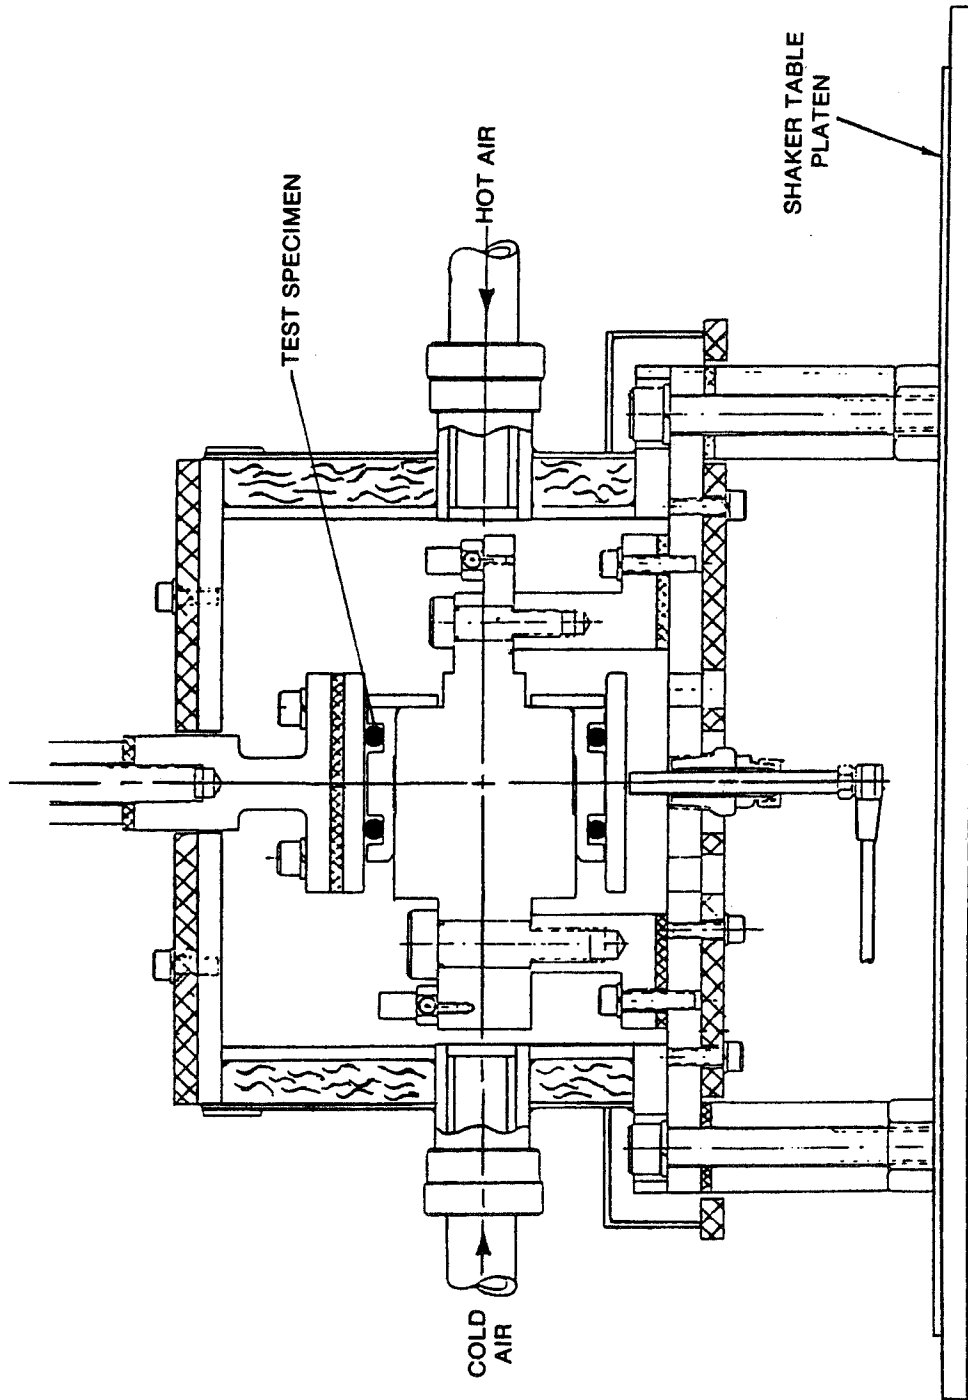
Assembly Drawing: O-Ring Test Fixture
